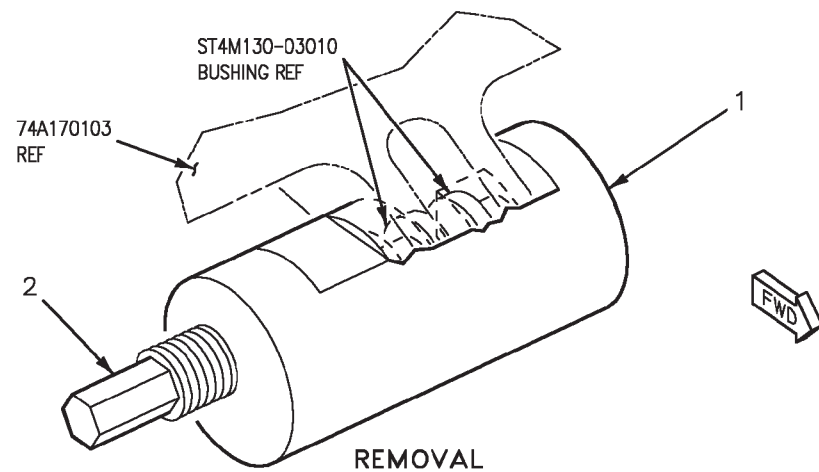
Bushing Removal, Installation, and Reaming (Sheet 17)
